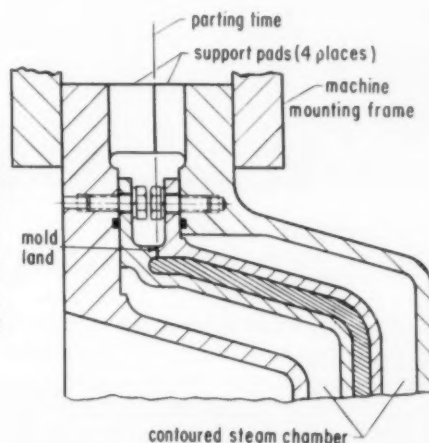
Contoured steam chamber mold made by hydro-forming. Force plate is tapered so that core of mold enters the cavity of the mold similar to a positive compression mold. Clamp forces are borne mainly by the support pillars. This design allows accurate control of the mold gap.
